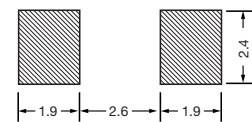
ECX-64AEN - Recommended Solder Pad Layout
